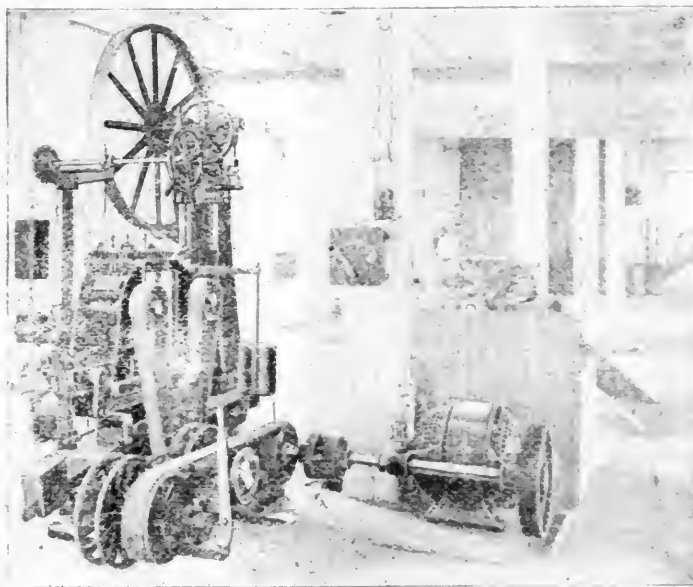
BAND RESAW, EQUIPPED WITH A DIRECT-COUPLED DRIVE FROM A 15-H. P. BACK-GEARED MOTOR.
